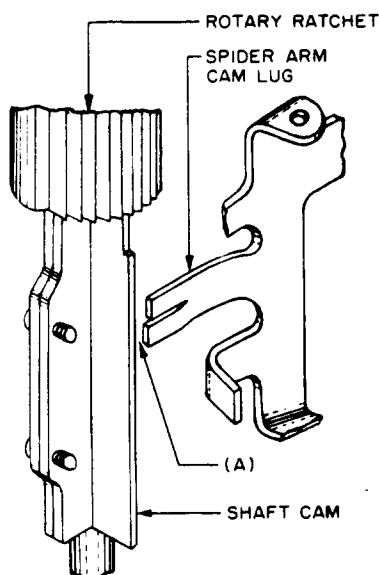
Relationship of the Spider Arm Cam Lug and the Shaft Cam
